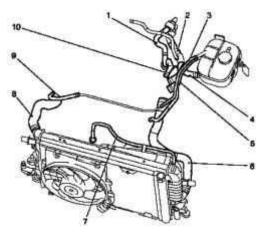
The components of the cooling system (engine 2.0 l): 1 feeding tube heater radiator, 2 heater radiator hose-back and 3 connecting hose between the expansion tank the coolant and thermostat housing, 4 - connecting hose between the radiator and the coolant expansion tank; 5 relapsing hose coolant turbo 6 elbow pipe of the lower radiator hose, 7 - relapsing turbocharger coolant hose, 8 - upper radiator hose elbow pipe, 9 - connecting hose between the expansion tank the coolant and thermostat housing, 10 - hose, electric pump coolant
